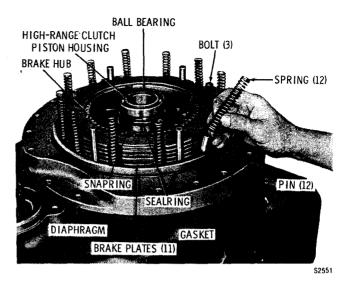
Removing brake return springs and guide pins (TTB 2221-1, 2421-1)
